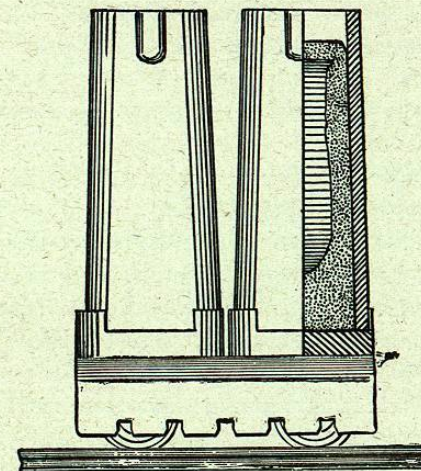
Mould Car for the Car-casting System, Showing the Tapered Ingot inside the Mould.
